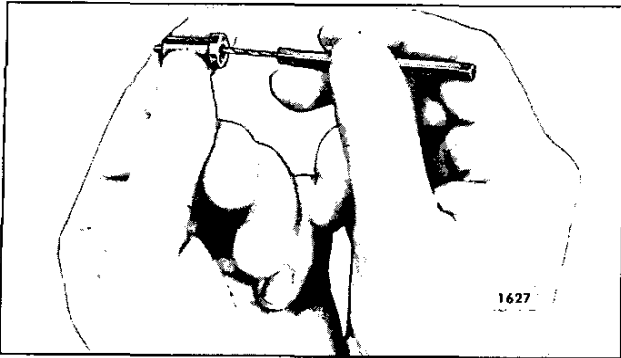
Cleaning Injector Spray Tip Using Tool J 1243
